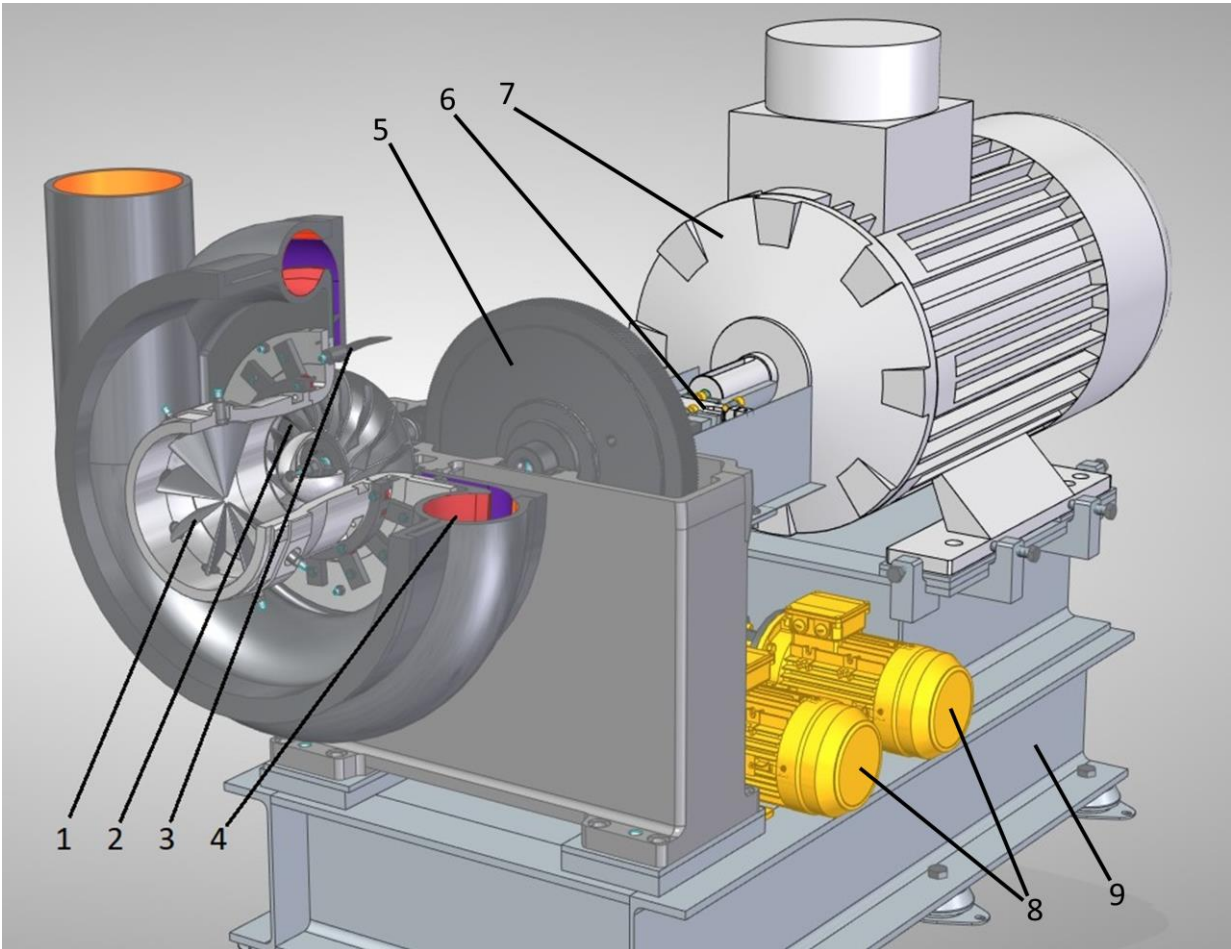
Centrifugal blower assembly, where: 1 – inlet guide vane; 2 – centrifugal impeller; 3 – variable vane diffuser; 4 – volute; 5 – spur gear wheel of the speed multiplier; 6 – intermediate coupling; 7 – main electric motor; 8 – oil pump motors; 9 – base frame [image generated by the author]
